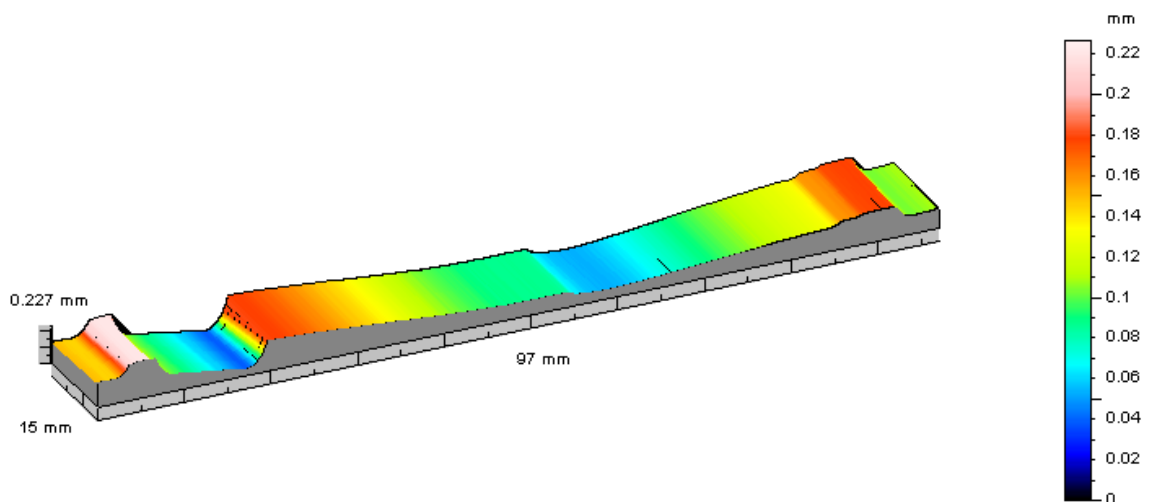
Three dimensional representation of the measured surface profile of a thin-plate workpiece machined under the fixturing scenario, where the passive clamp ( $F_c = 20$ ) N is continuously moving, following the motion of tool.
